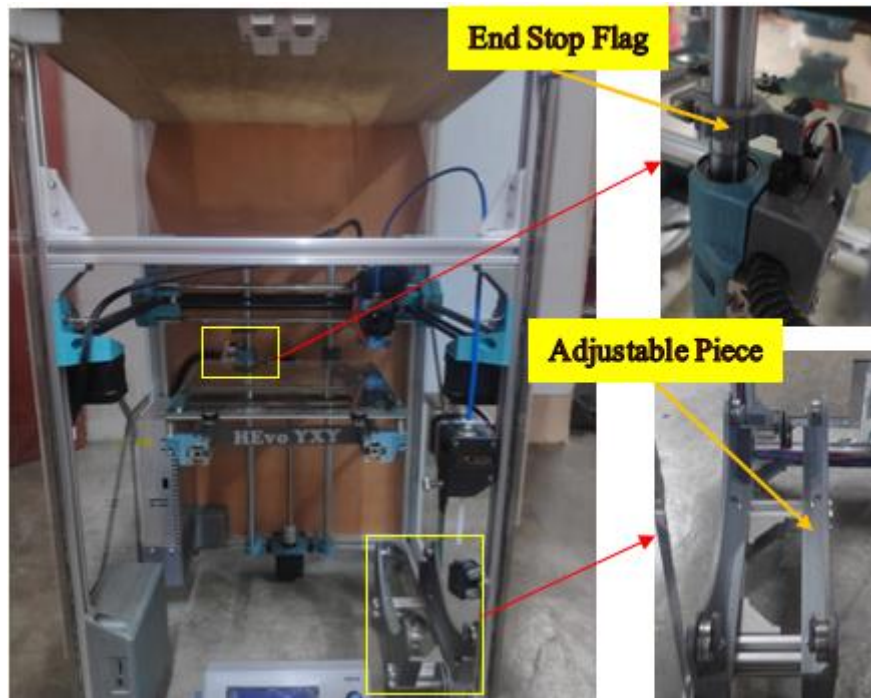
Detail Views of Non-contact Optical End Stop and Universal Spool Holder Designed.
